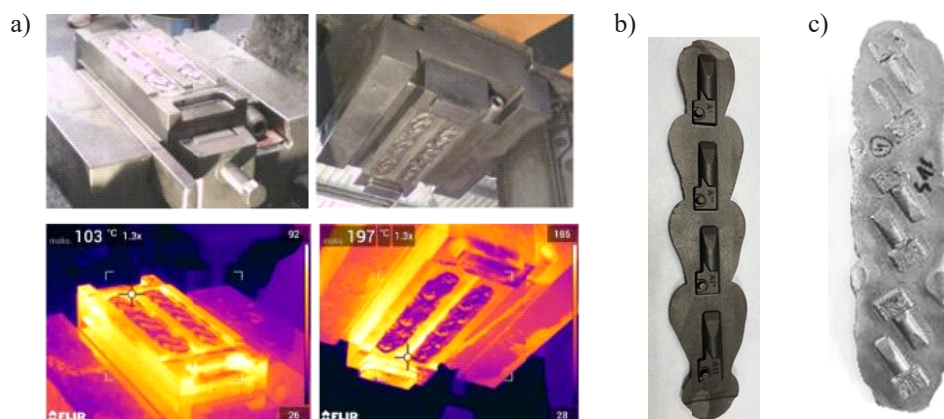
View of: a) an image of the forging tools with the process thermograms, b) the material arrangement and the consecutive forging phases, c) images of the forgings in a 4-fold system
